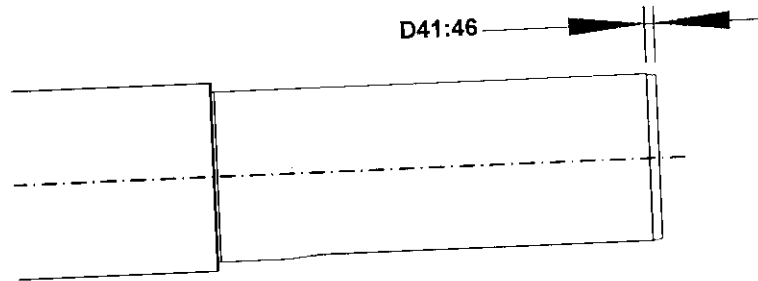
Relation for chamfer on right side of Drive Shaft
